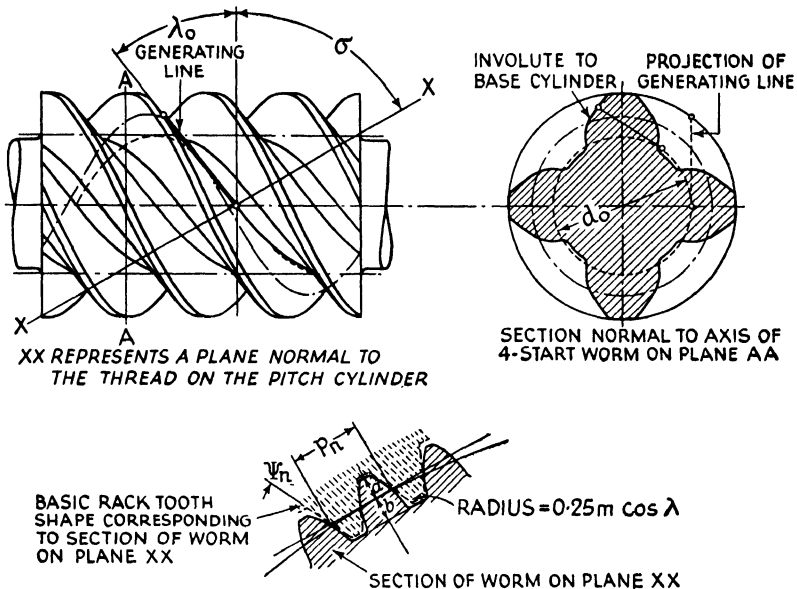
BASIC DIMENSIONS OF B.S. WORM THREAD AND GENERATING RACK
